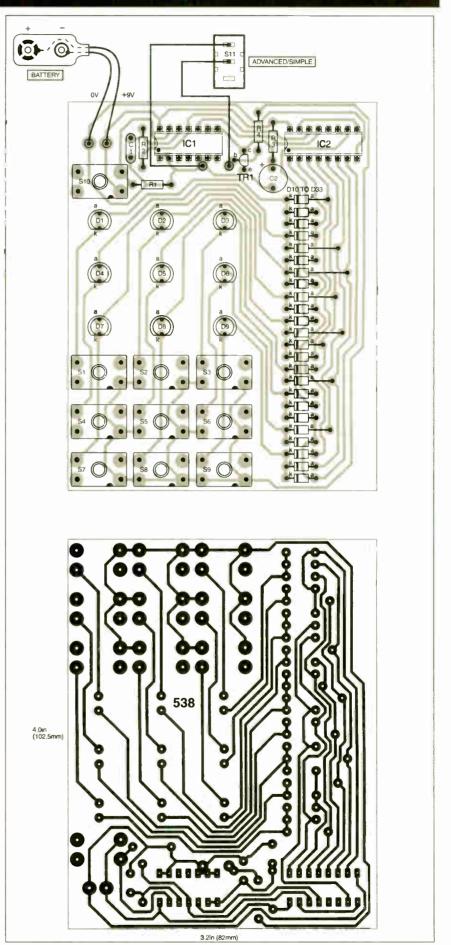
Printed circuit board component layout and copper foil trackside master for the Noughts and Crosses Enigma
